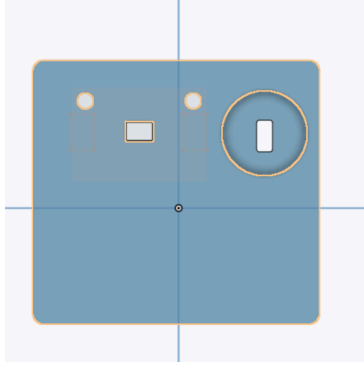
bottom of the FITBOT with hole that fits the sensor, left for the pressure sensor and the right for the pulse sensor.
